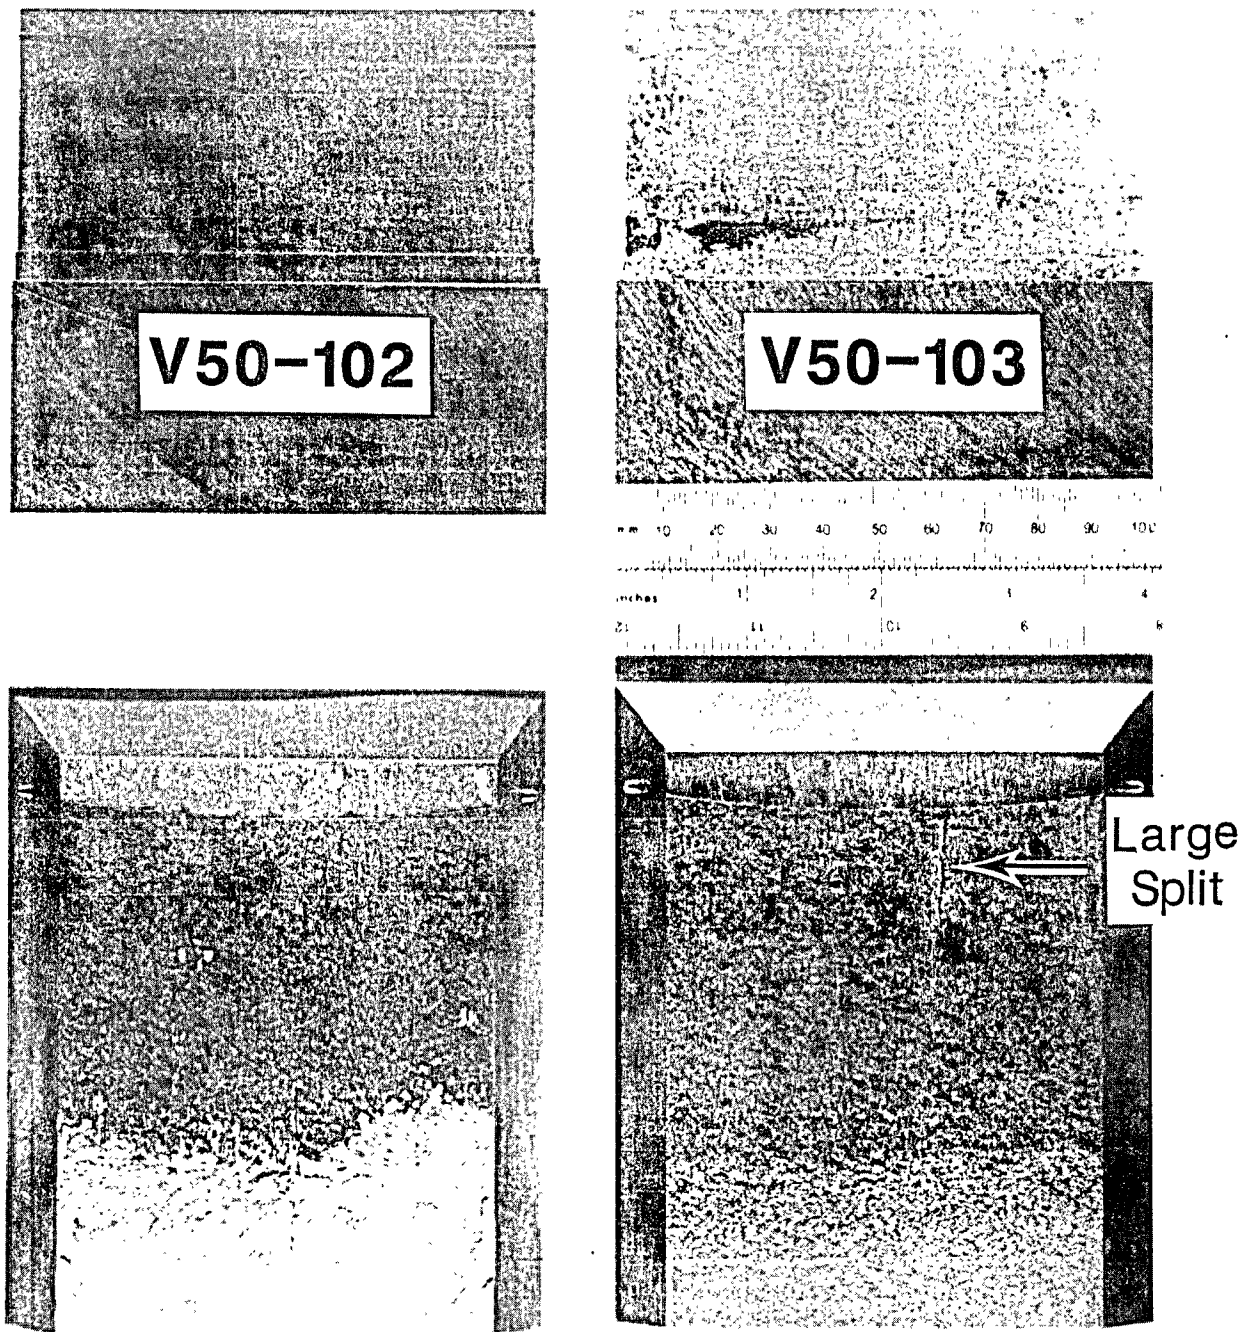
Fracture surfaces of the 4T-CT specimens.
